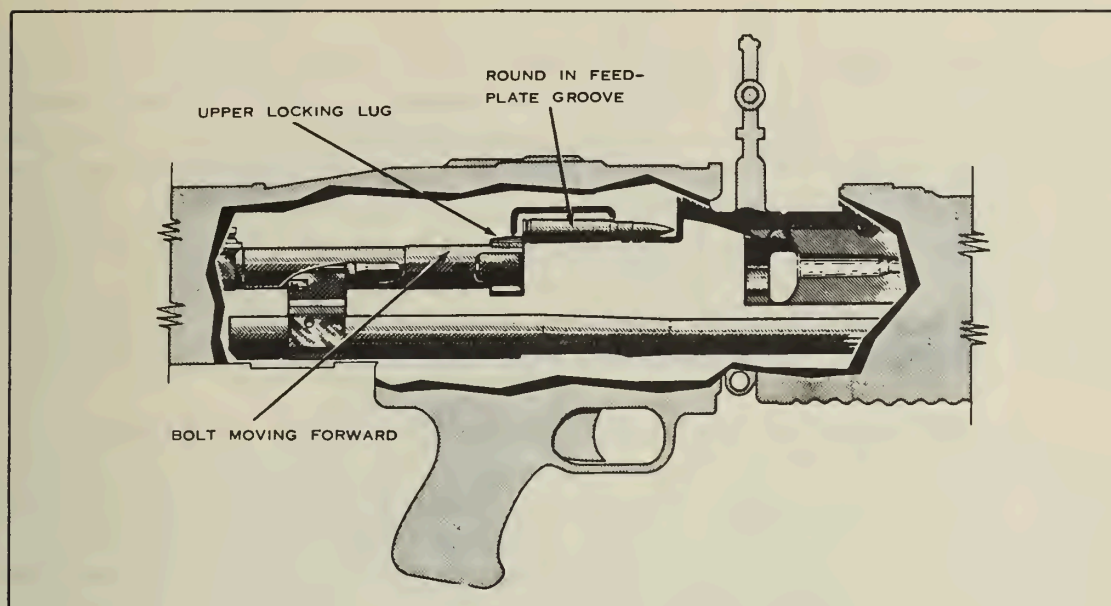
Chambering - Bolt Contacting the Cartridge.
